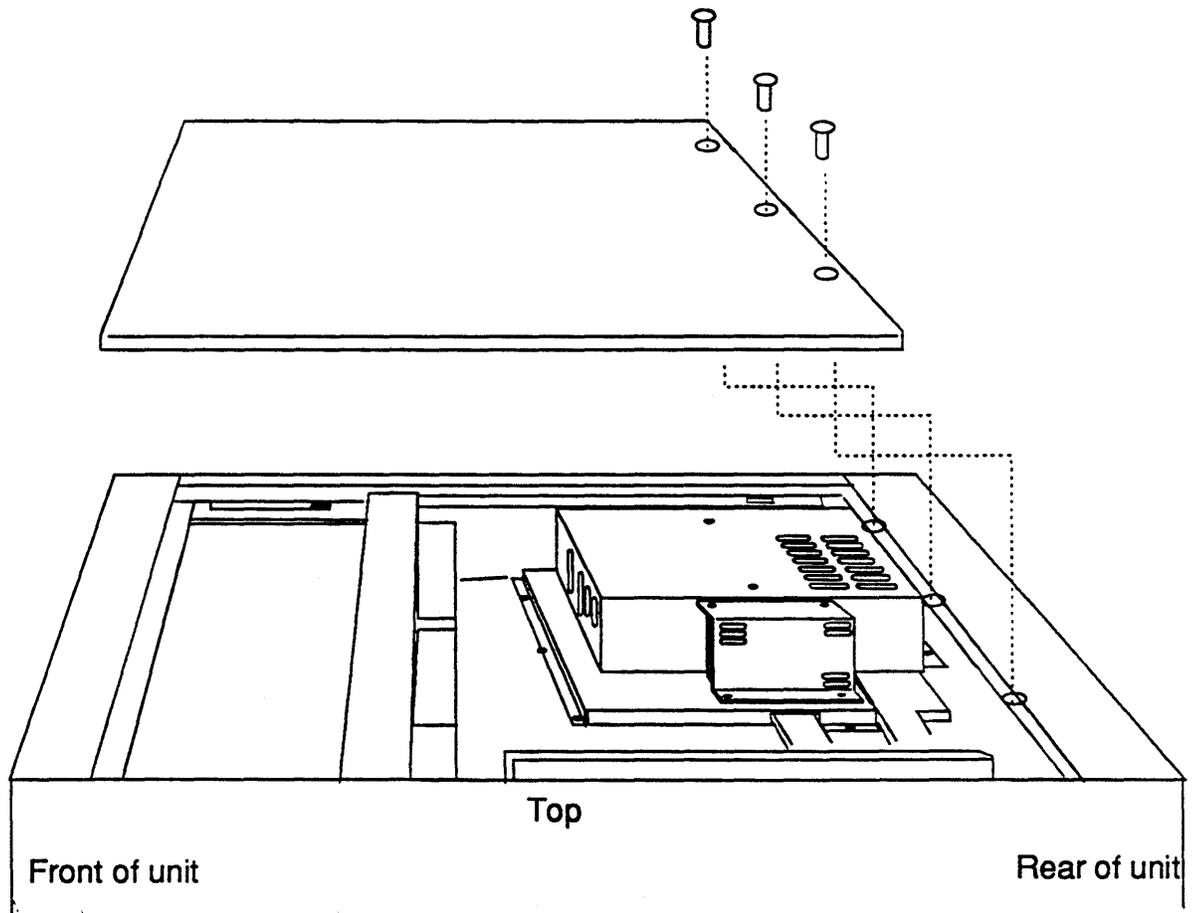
Power Supply Chassis-RMM Module, Top View
